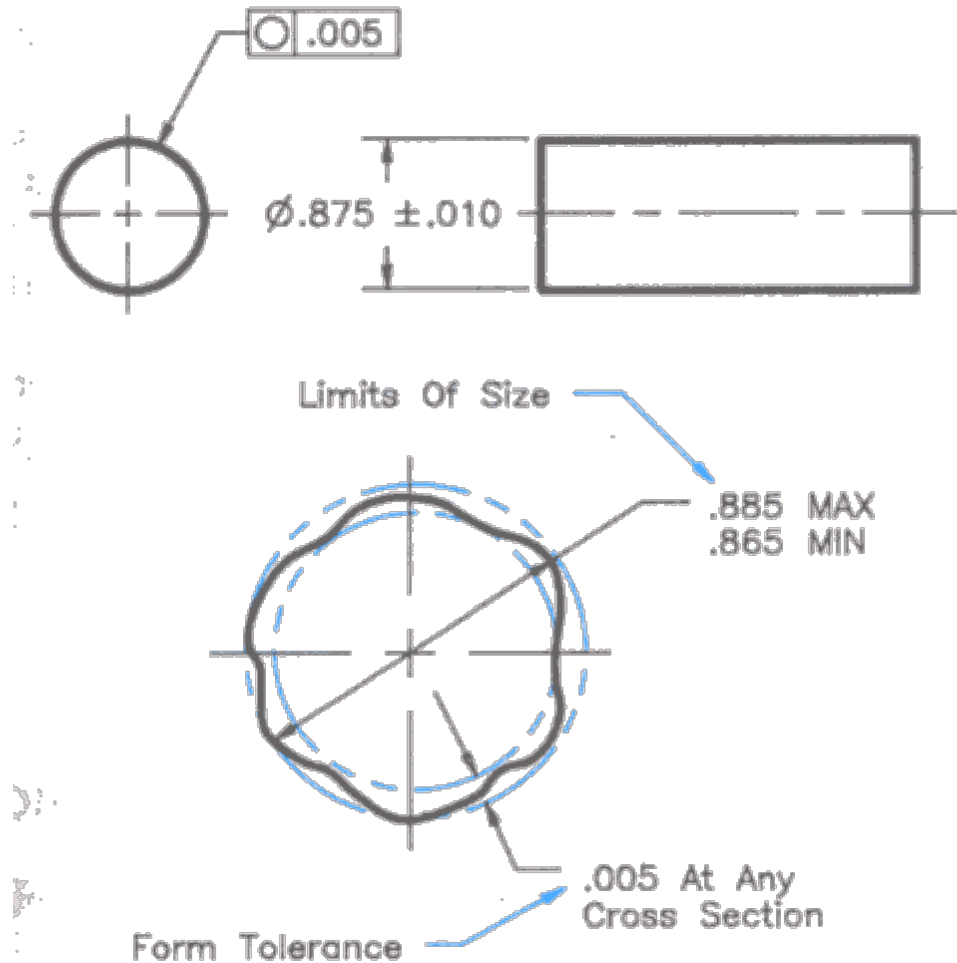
Circularity tolerances control circular cross sections.
